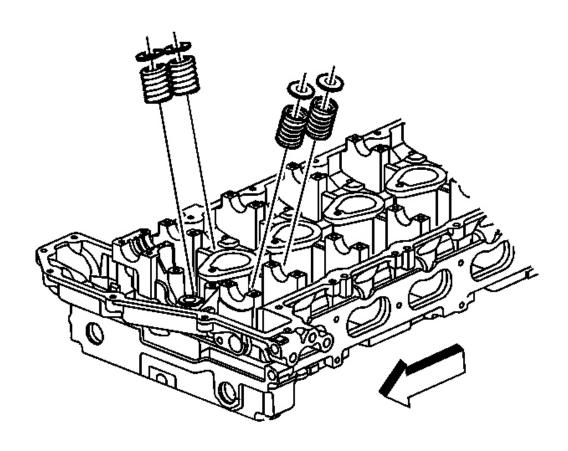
View Of Valve Springs & Retainers Courtesy of GENERAL MOTORS CORP.
